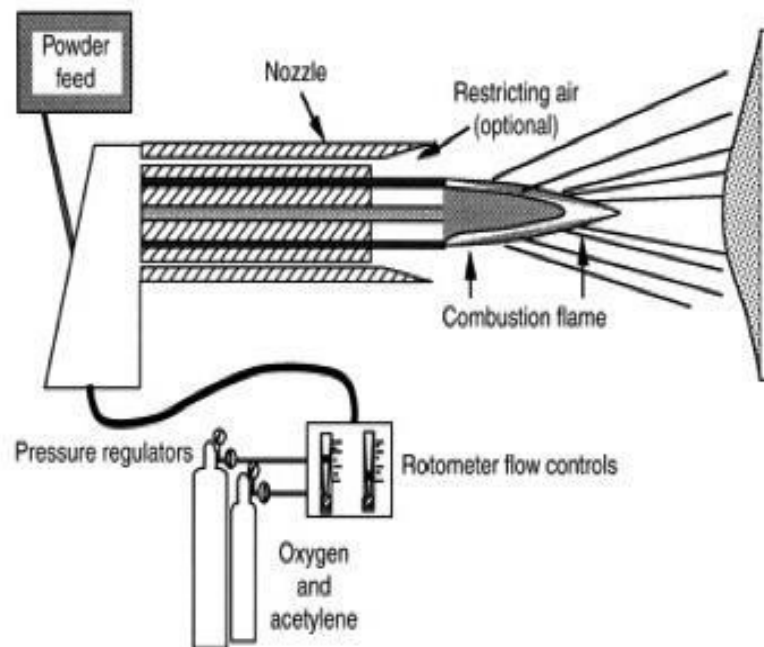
Powder spraying (Courtesy weldguru.com)
